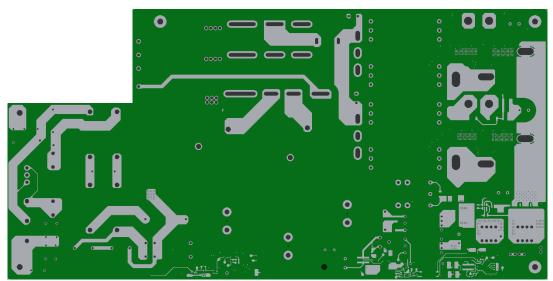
shows PCB pattern diagram of the main board, Fig. 3.2 shows PCB pattern diagram of the PFC board, Fig. 3.3 shows PCB pattern diagram of the PSFB board.
